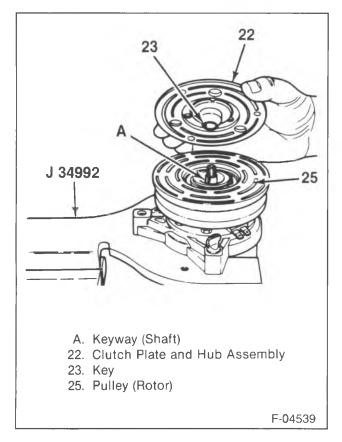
Removing the Clutch Plate and Hub and Shaft Key
